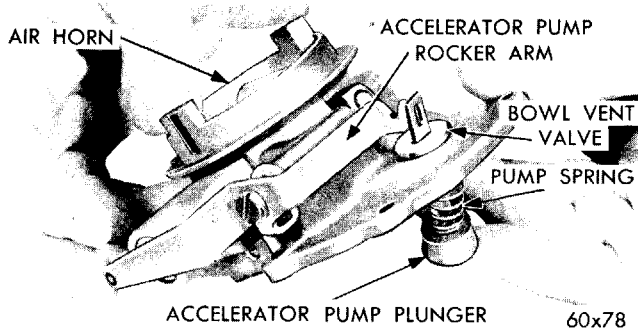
Removing or Installing Accelerator Pump Plunger
